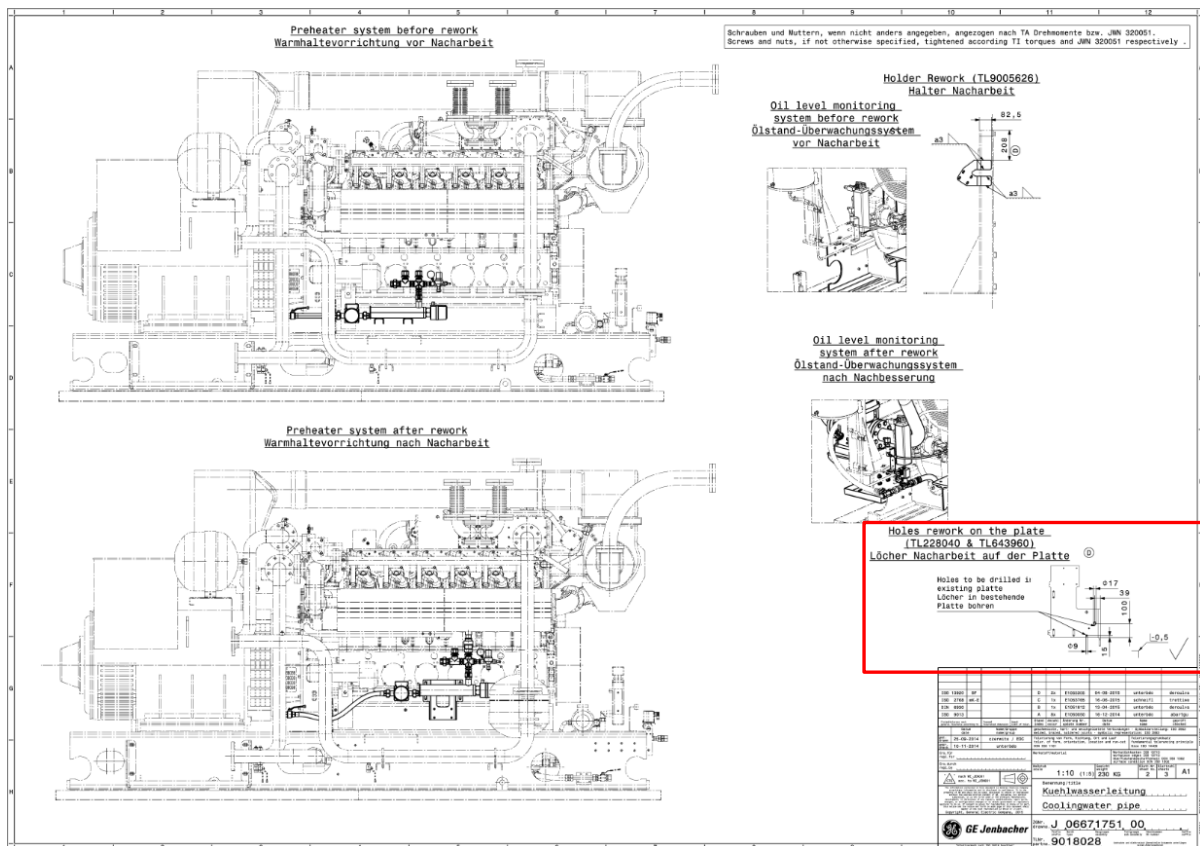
Drawing - cooling water pipe for electric engine cooling water pump (2)
